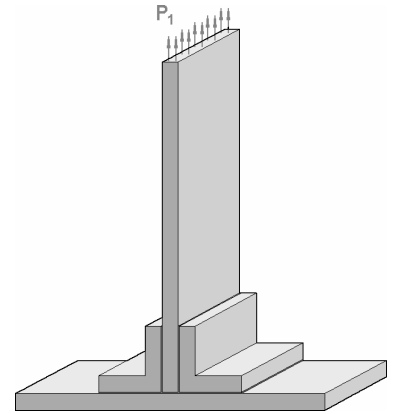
Tee-joint geometry and dimensions. The steel plates and supports are bonded with a thin adhesive layer.
